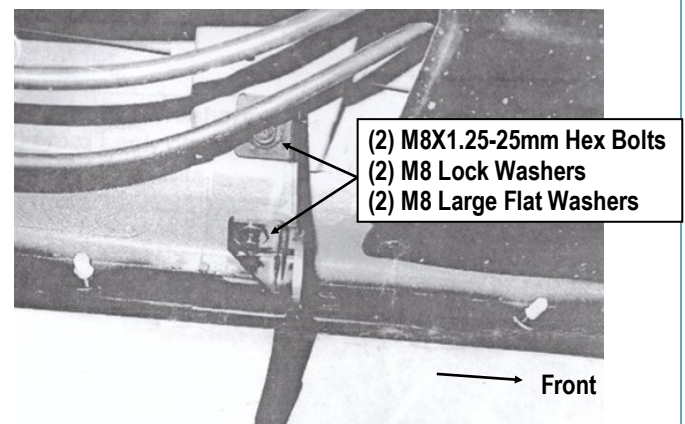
Driver Front Mounting Bracket (DFM) Installation
